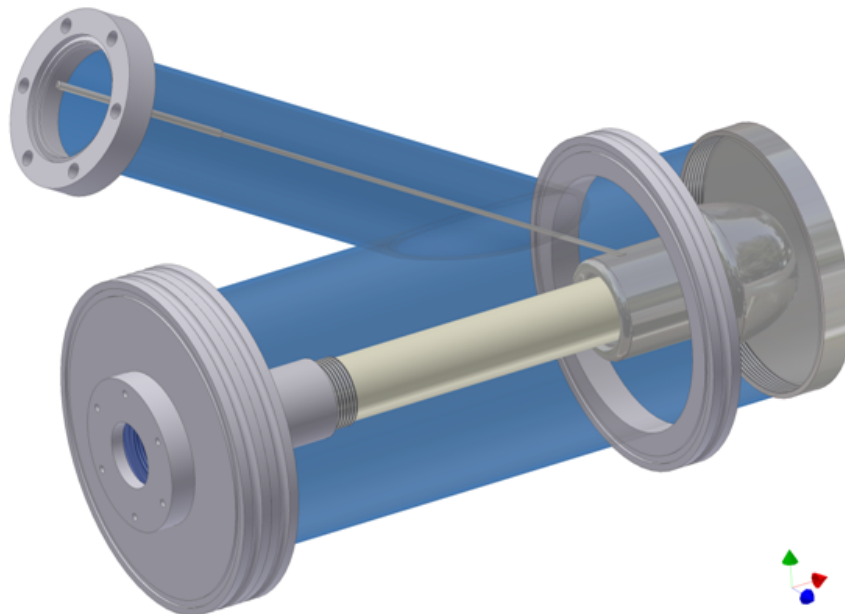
Three dimensional rendering of assembled electron gun design.
